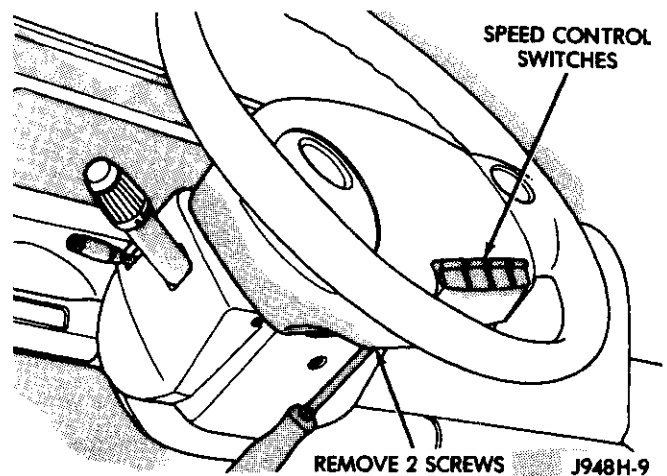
Speed Control Switch/Trim Bar Remove/Install
